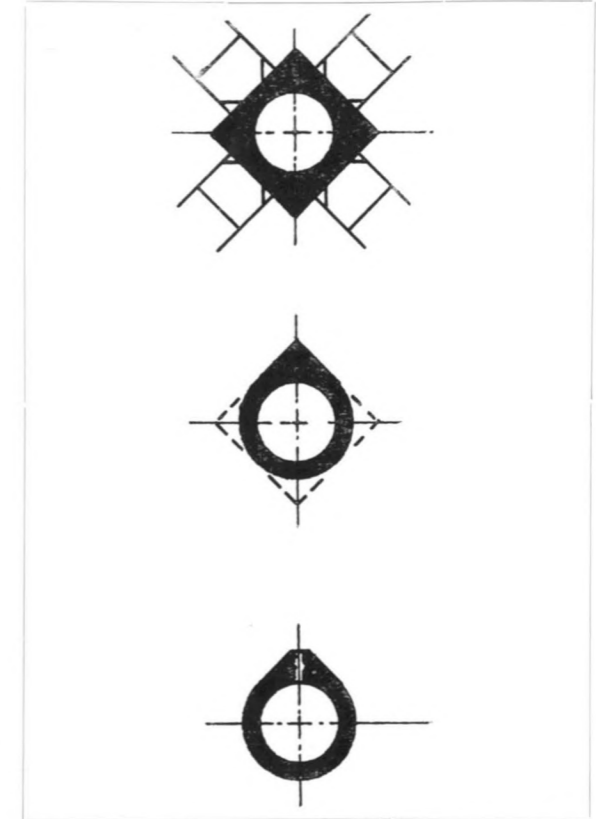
Sequence of operations for making eccentric strap. Drawn full size. From top to bottom :
